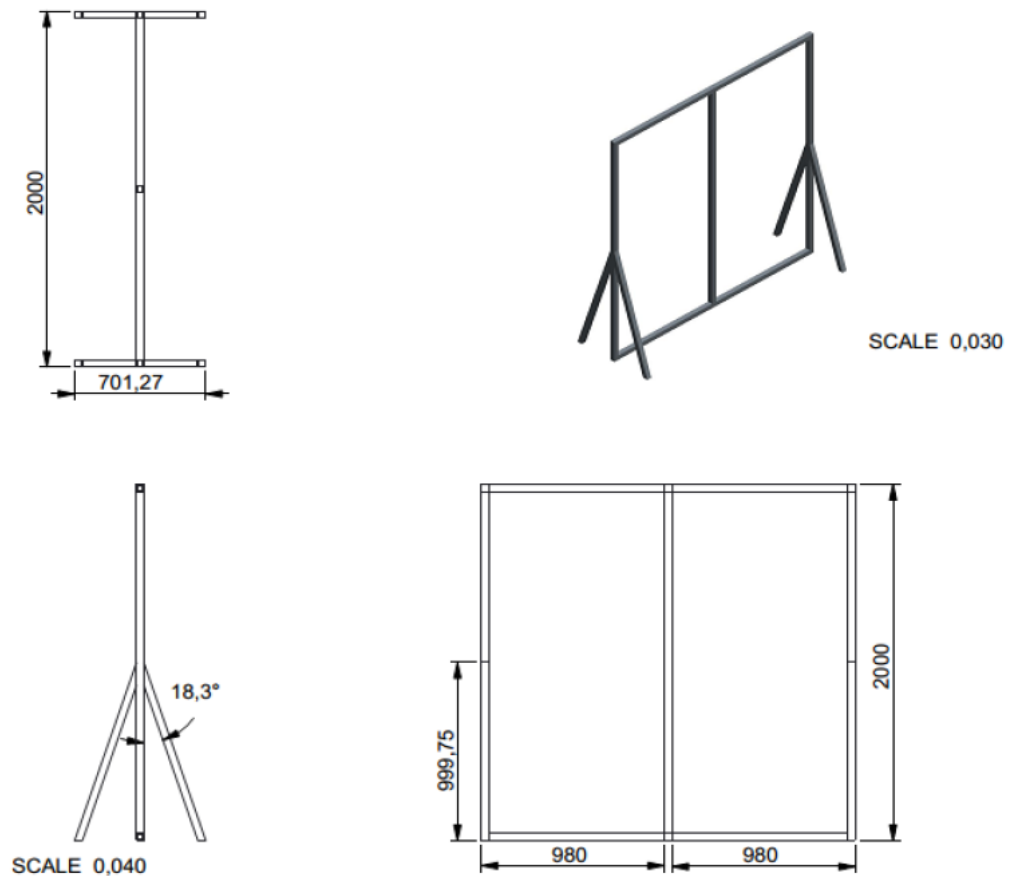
CAD drawings of the frame: 3D, front and right views of the top part.
